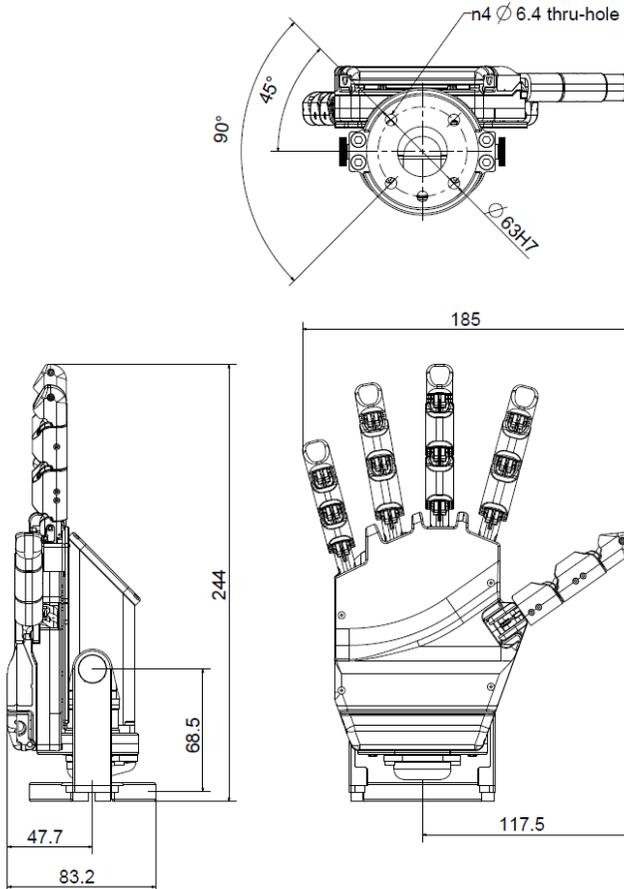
qb SoftHand Industry dimensions, which are the same for the left and right hand (dimensions in mm and out of scale).
